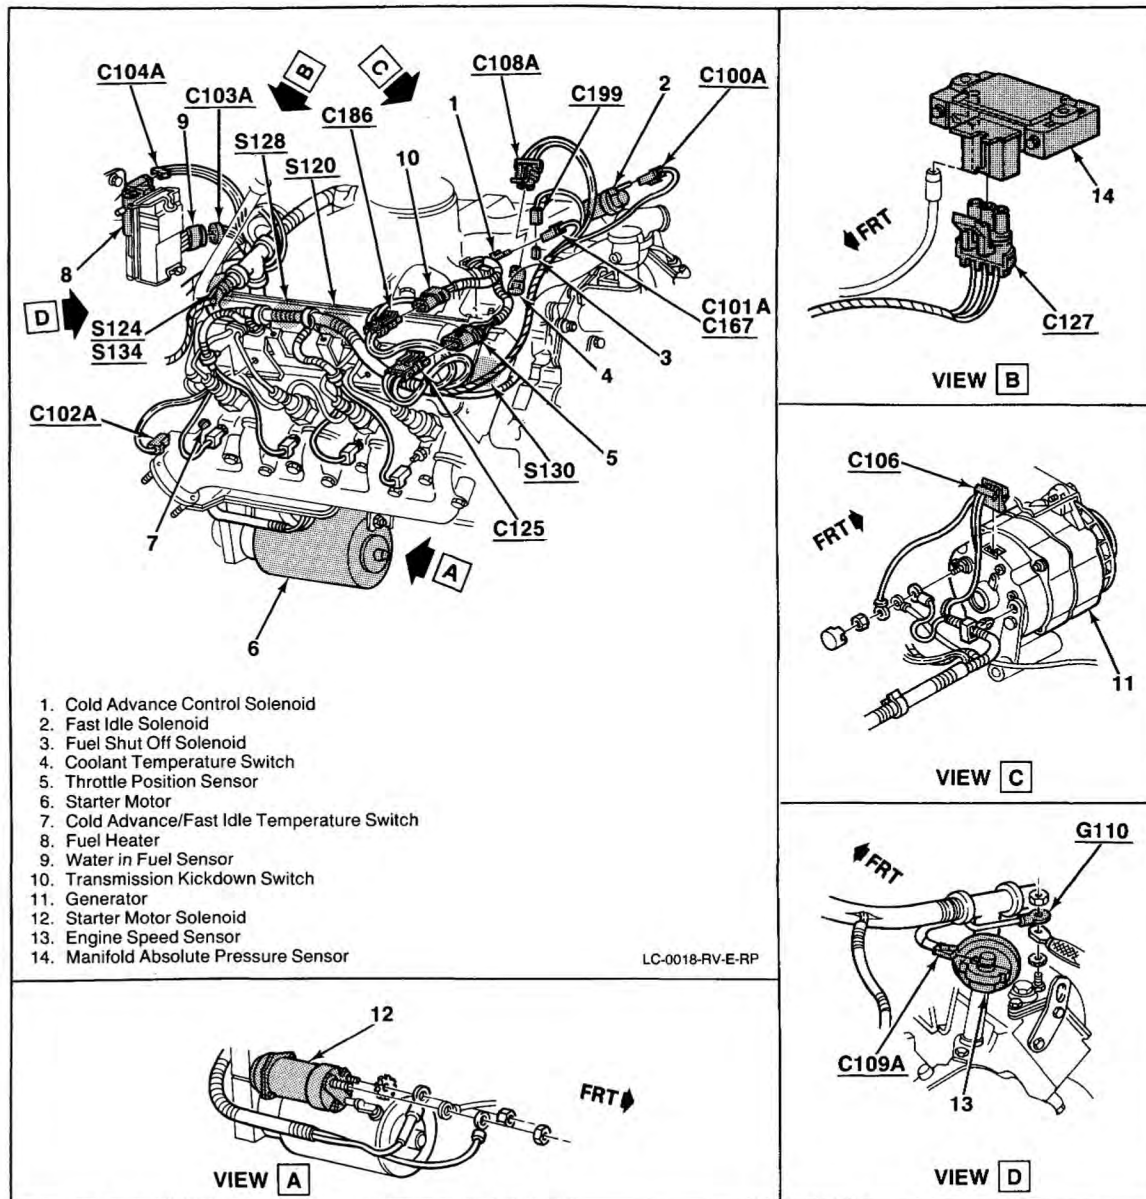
Engine Wiring Harness — RH Side — RPO LH6 and LL4
